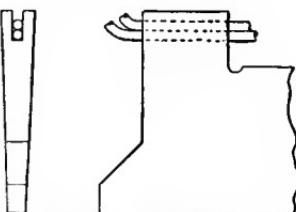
Armature Winding Connected Directly to Commutator Bar
